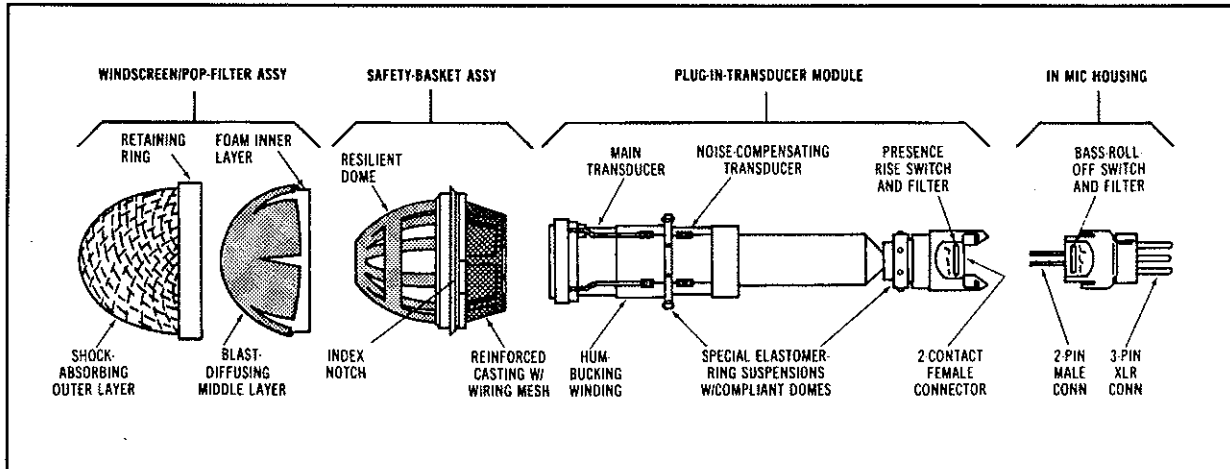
Sectional drawing of a dynamic cardioid microphone showing details of the major component parts. Drawing courtesy of AKG Acoustics US.
